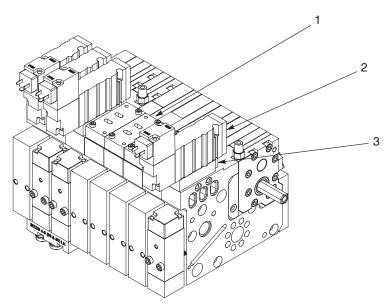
Example of manifold-mounted solenoid valves, heat isolation gaskets, and block-off plates
